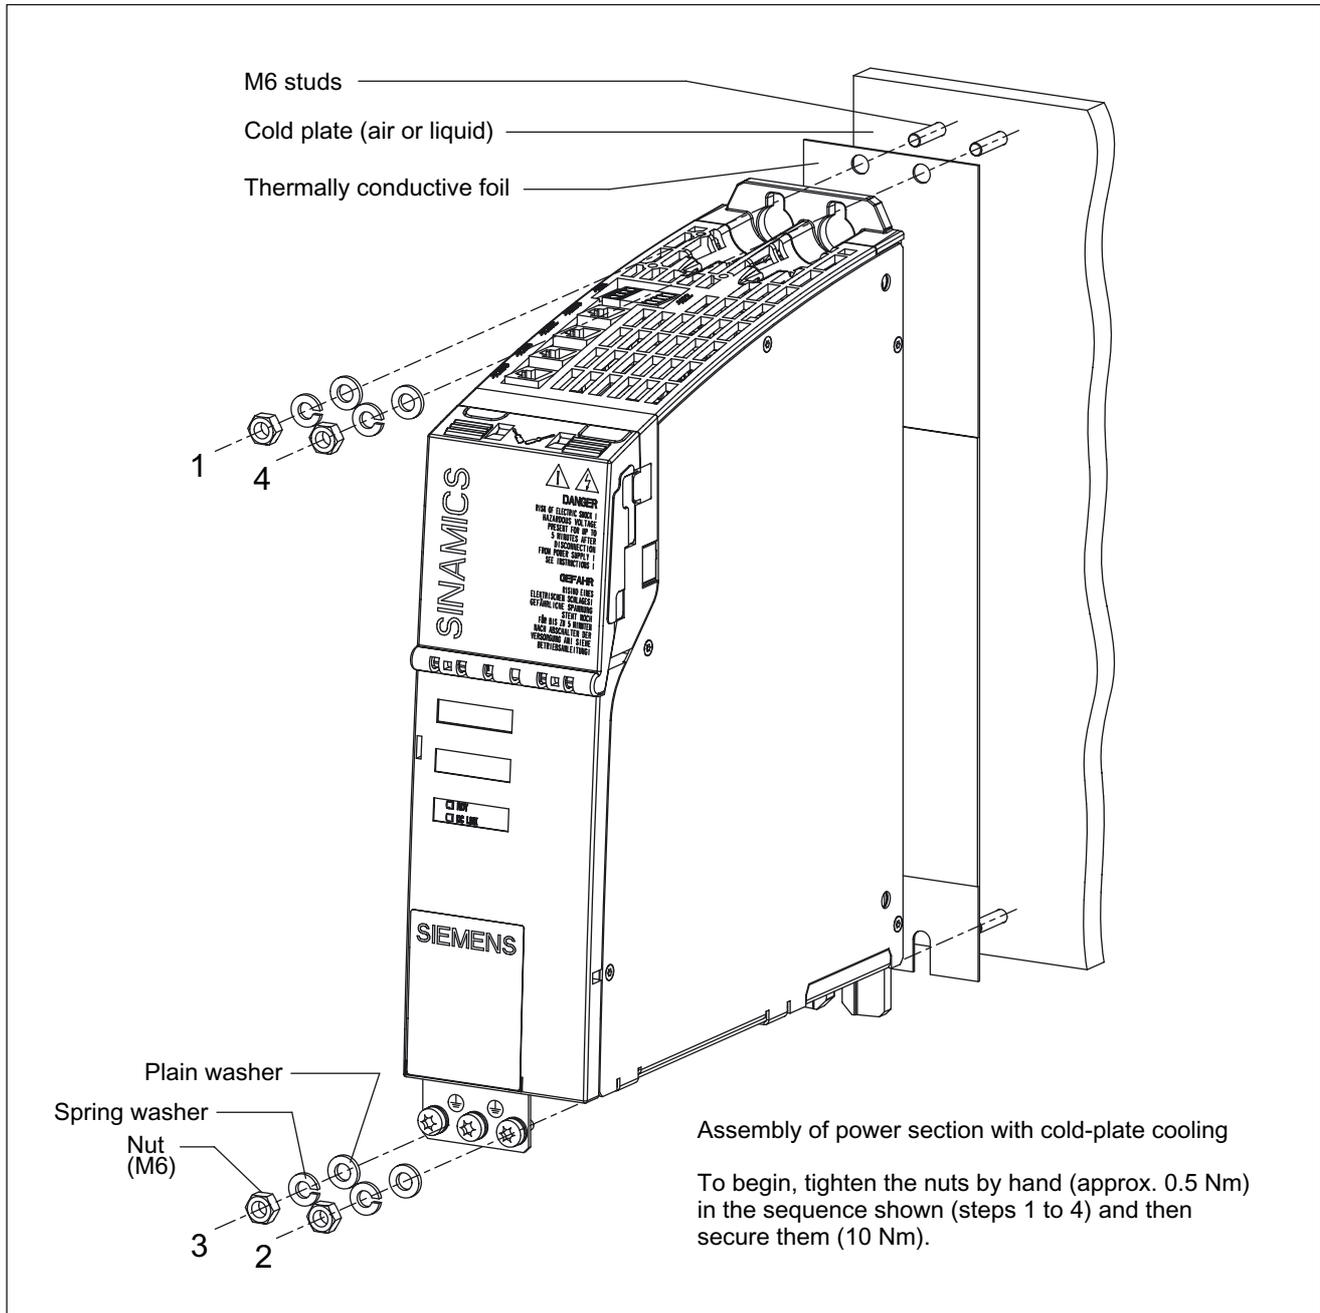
Installation: Motor Module Booksize Compact with cold plate
